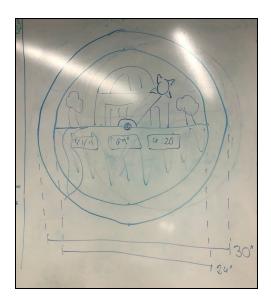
Whiteboard drawing of dimensioned window front face and viewing area
